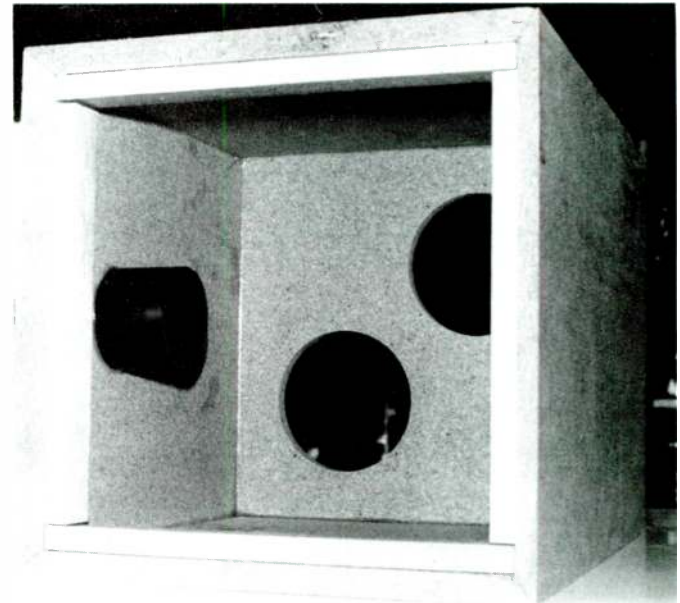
Cleats in place to accommodate cabinet end piece.
